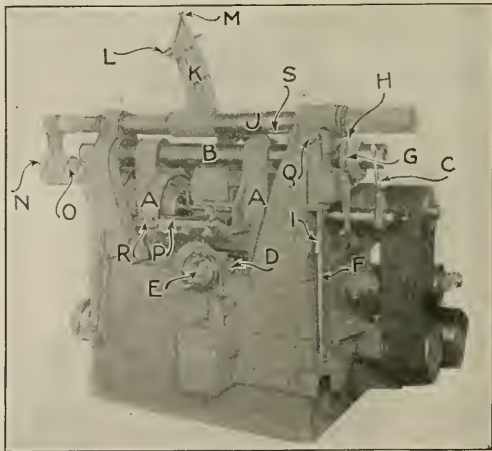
BRYANT FORM-GRINDING MACHINE, FRONT VIEW
